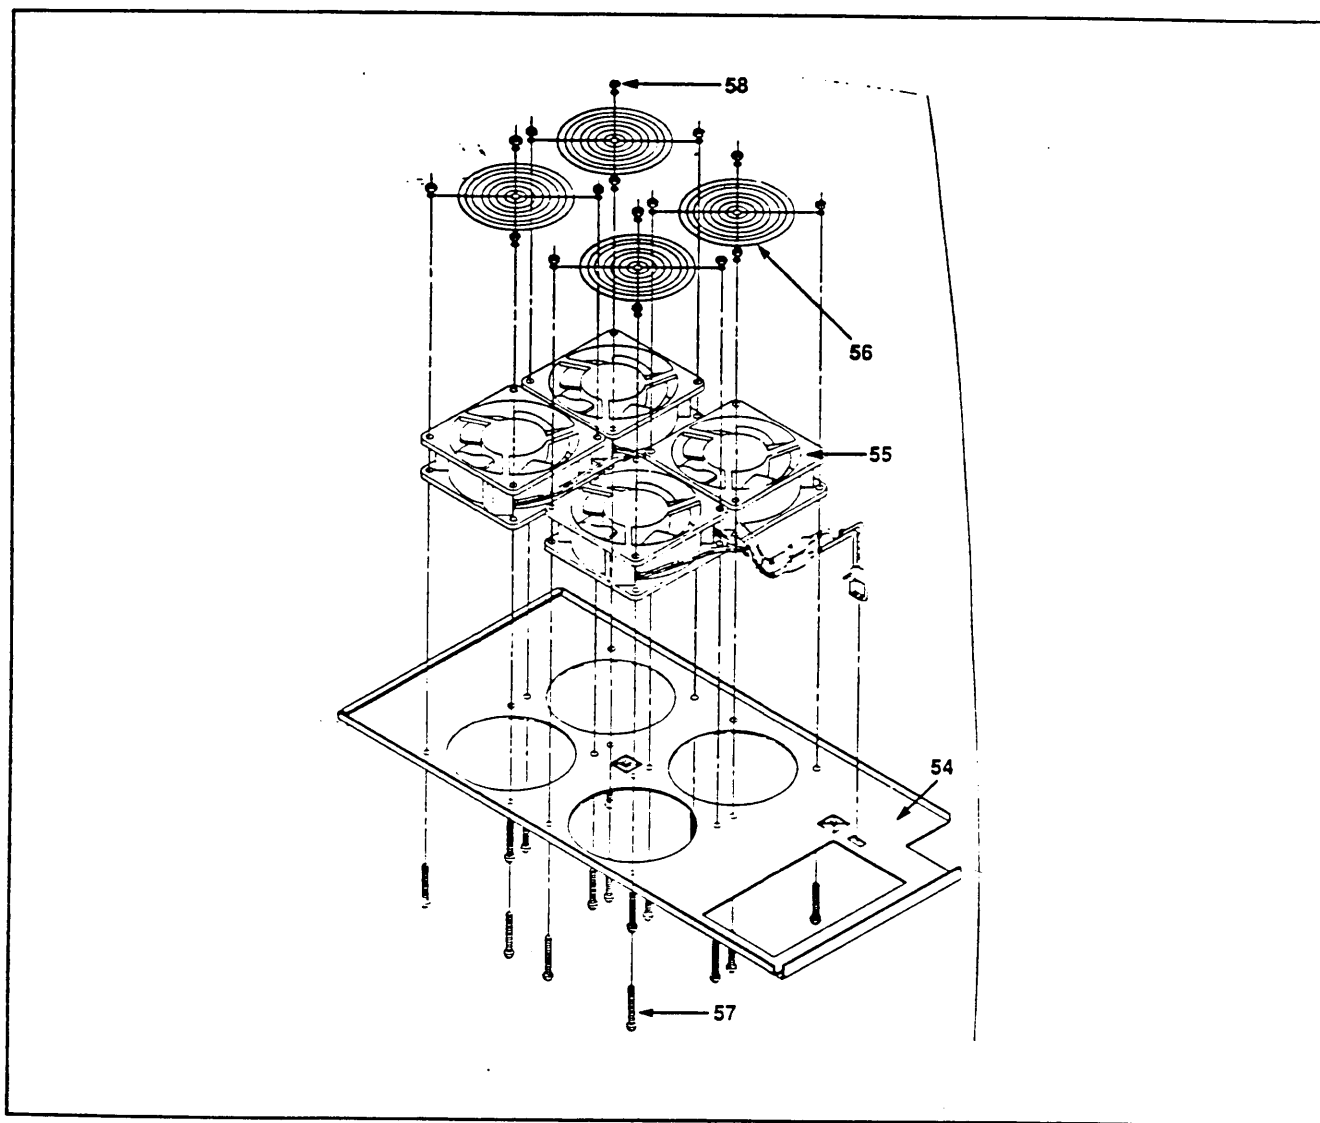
Illustrated Parts Breakdown #8: Lower Fan Mounting
